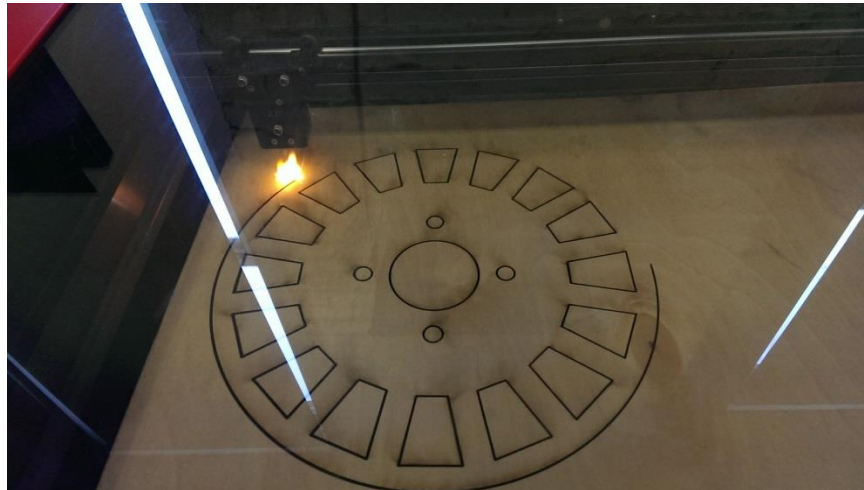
Laser Cutting of Wooden, Magnet Rotor, Assembly Frame
